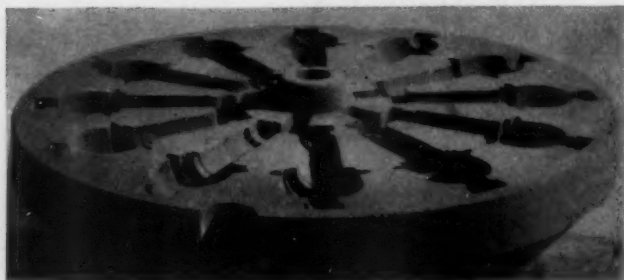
ONE OF THE 24 COPE CORES IN BEARING ASSEMBLY (FIG. 12).
